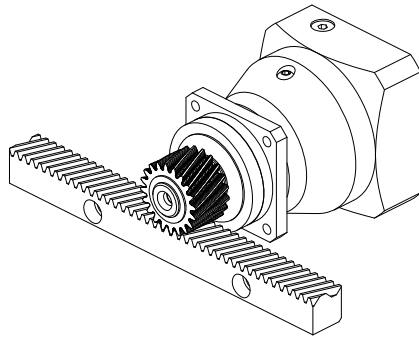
Recommendation for bearing assignment D (e.g. for helical gearing)
